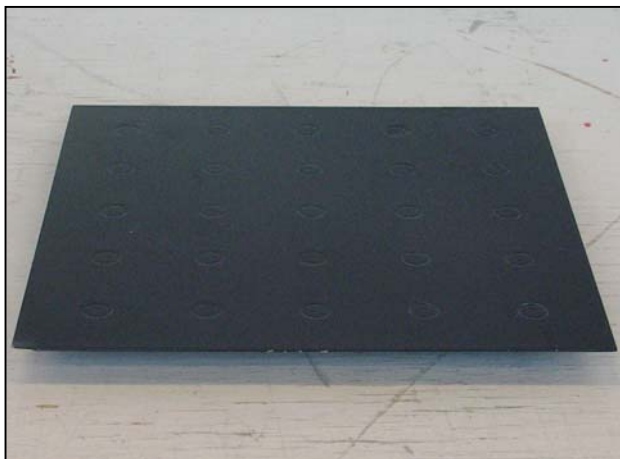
Specimen 8-9-FP, coincidentally painted after the Lock Bolt installation
